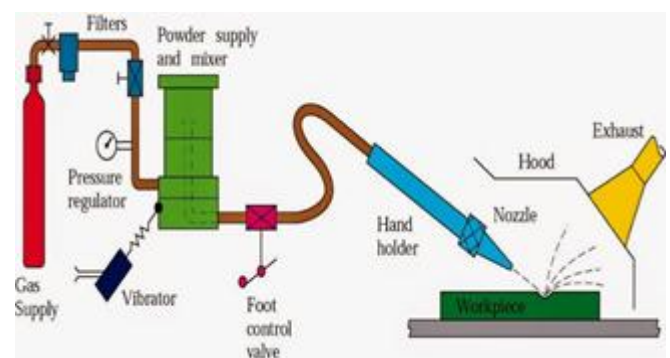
Schematic diagram of Abrasive Jet Machining [7]
